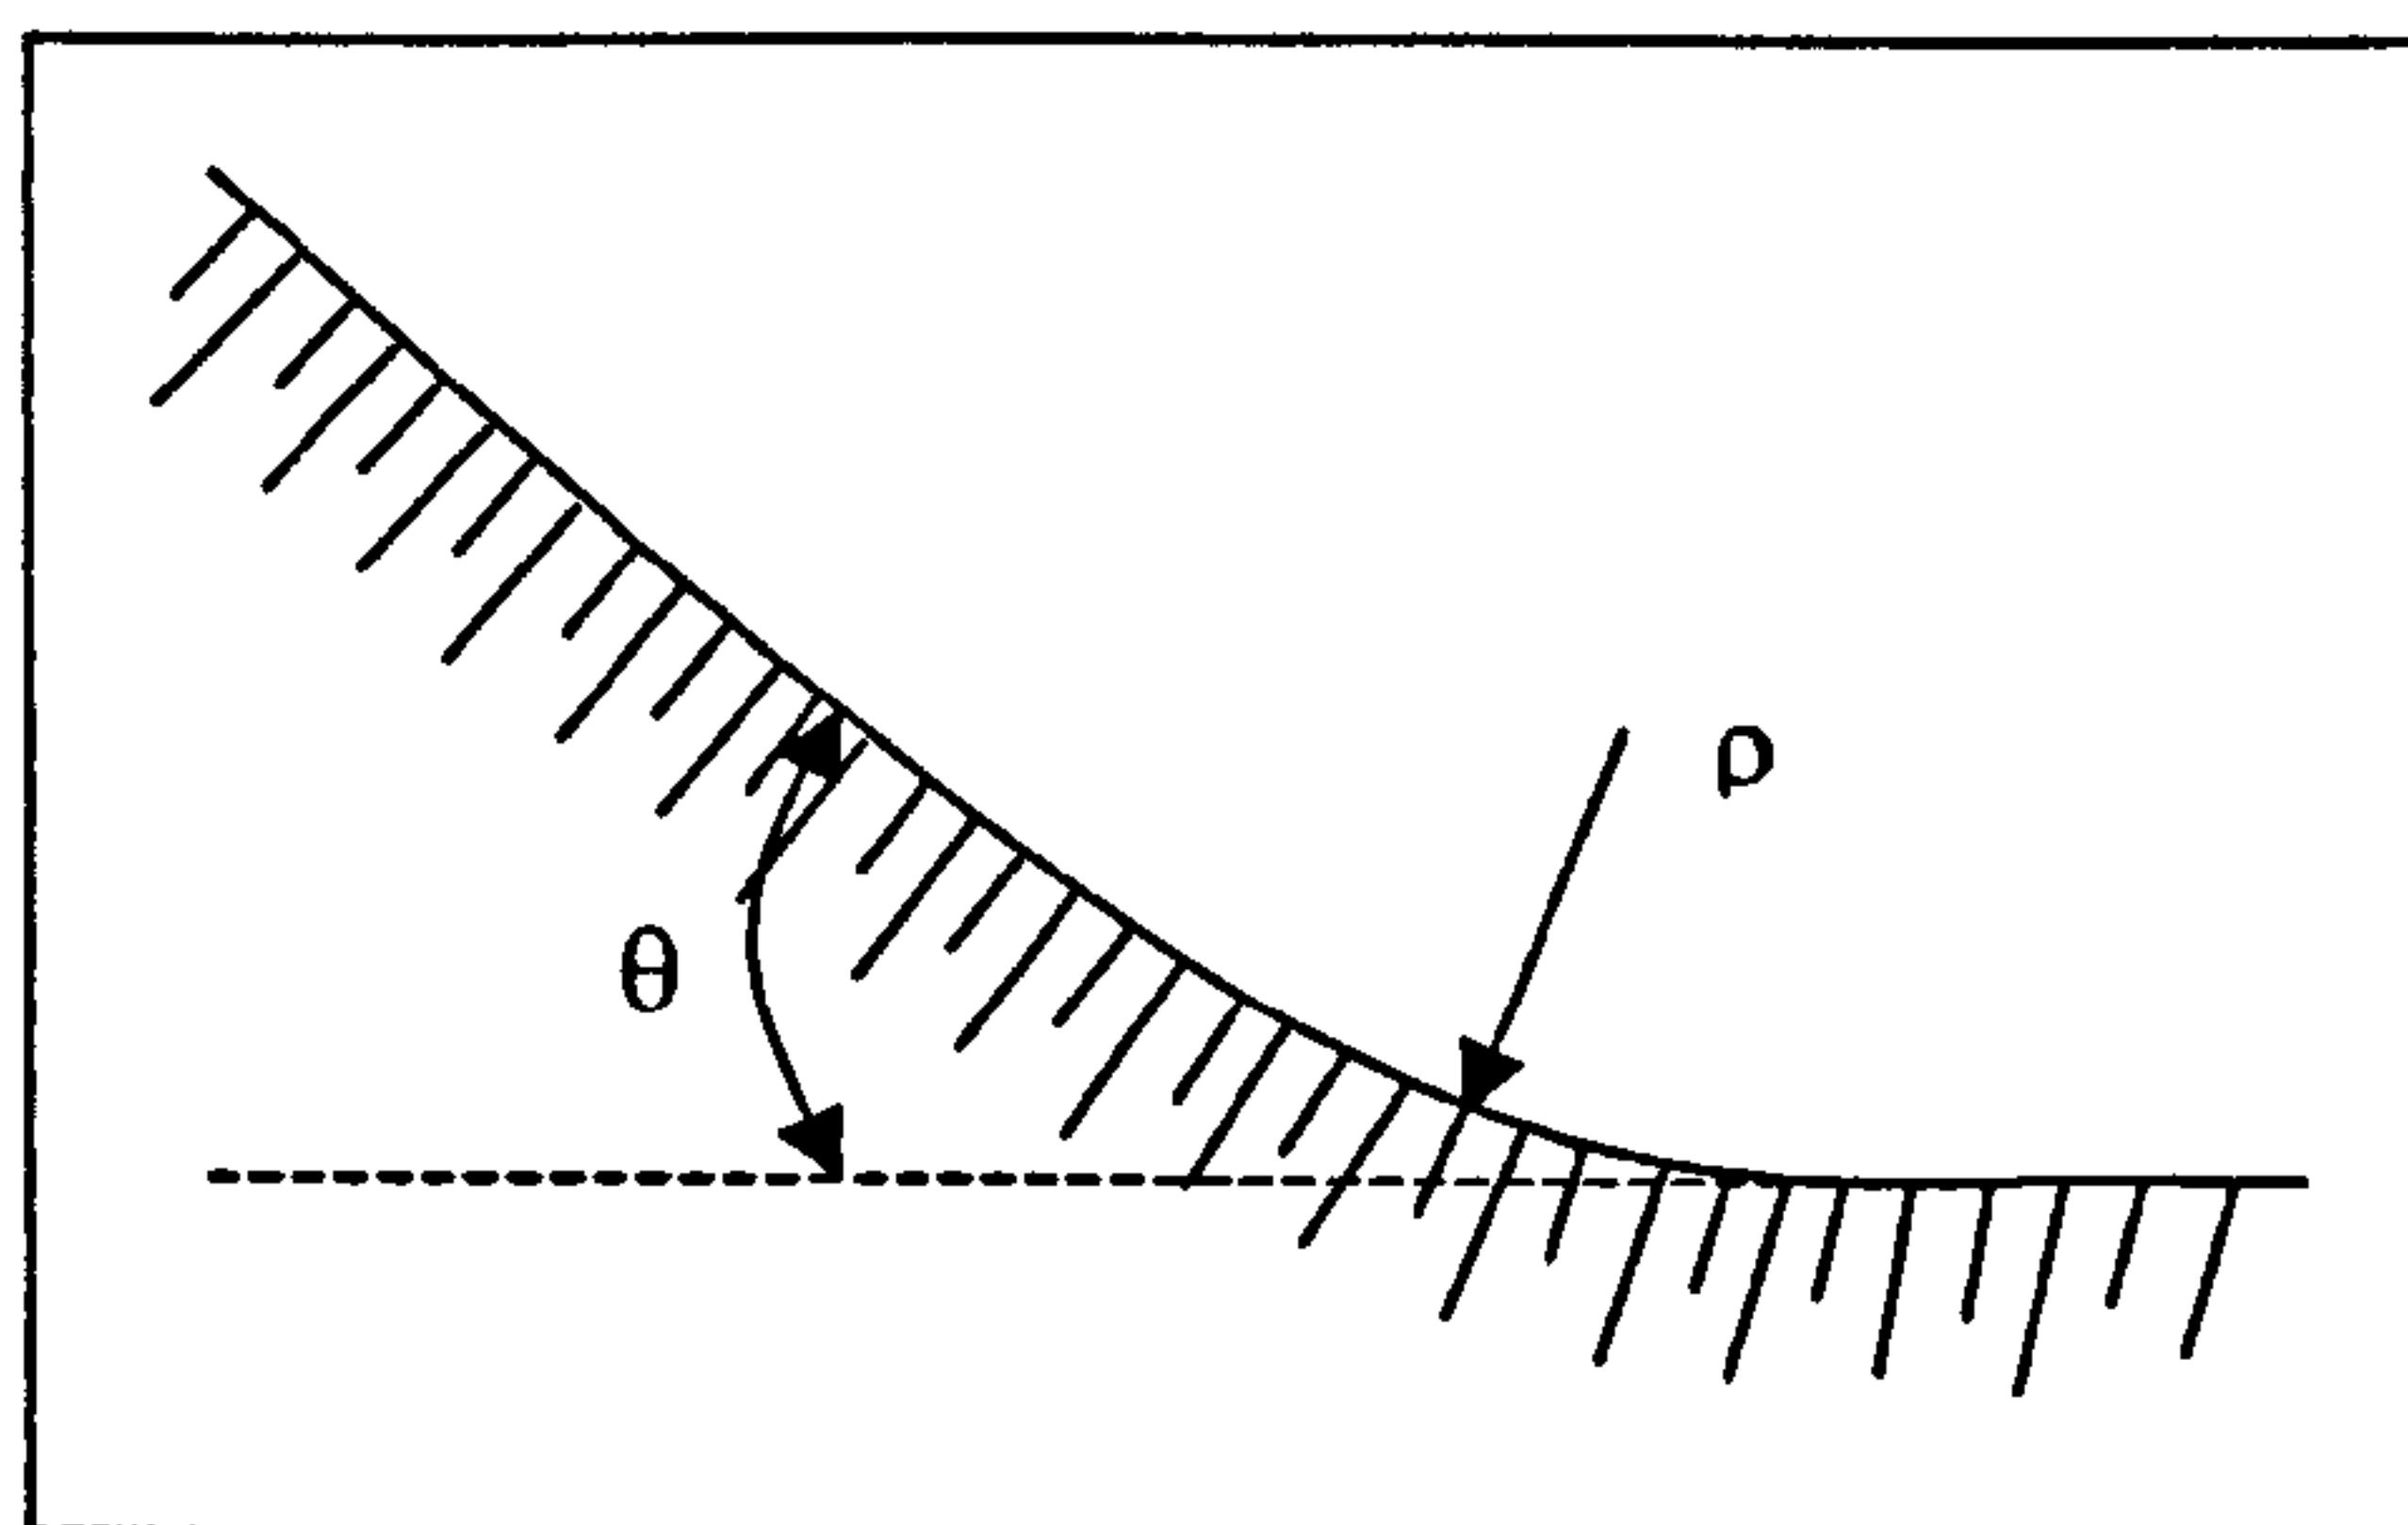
Weld toe profile, where θ and ρ are the weld toe angle and radius respectively.
